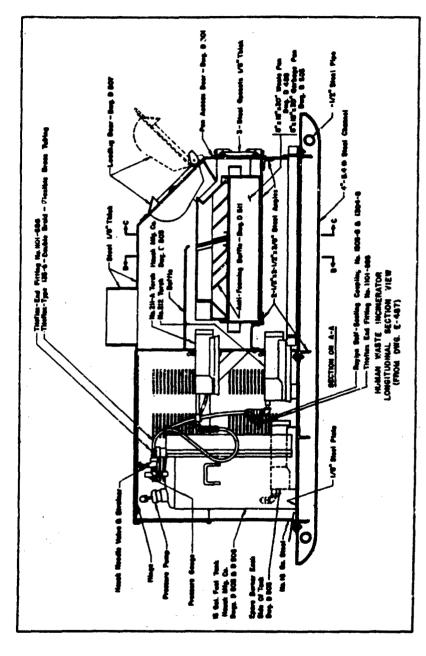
Cross section of the Prototype Portable Incinerator for a 22-man barracks unit.
